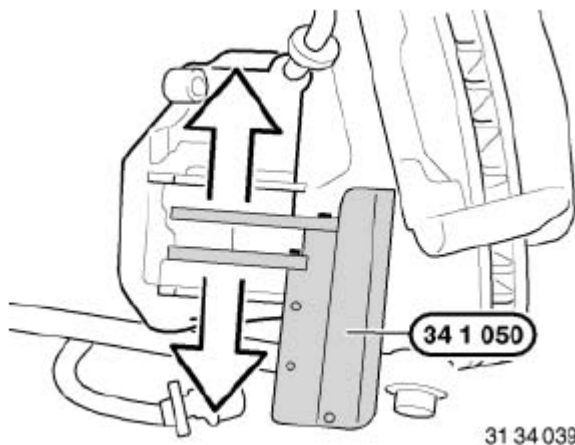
Turning Piston Fully Back With Special Tool 34 1 050
